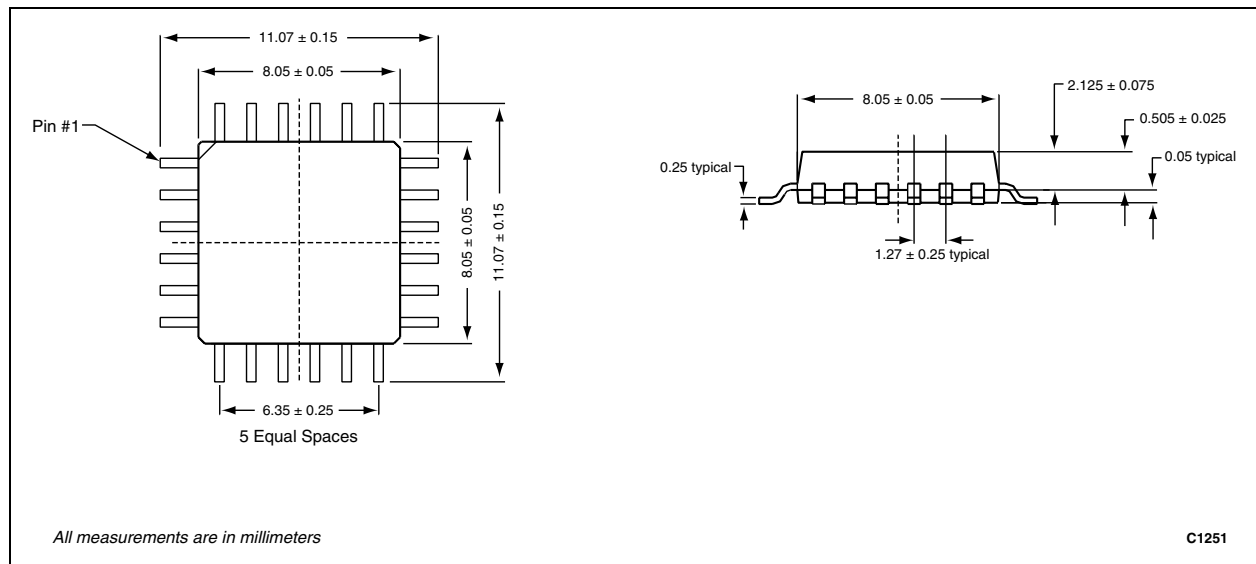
CX42054 24-Pin PQFP Package Dimension Drawing
